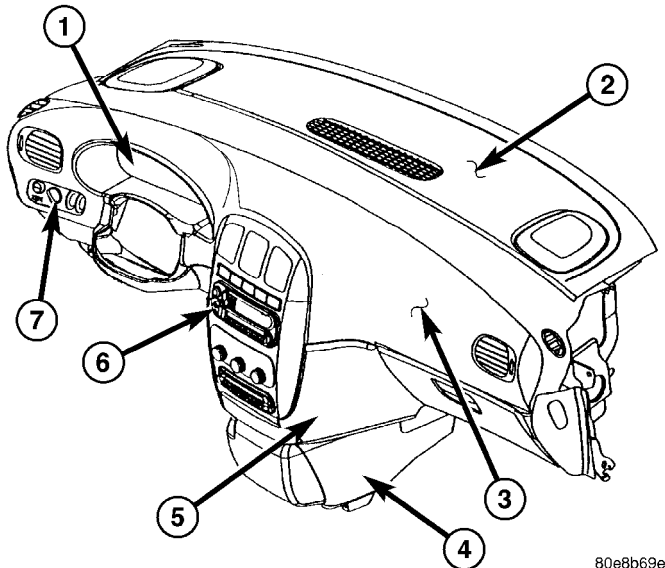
INSTRUMENT PANEL ASSEMBLY
